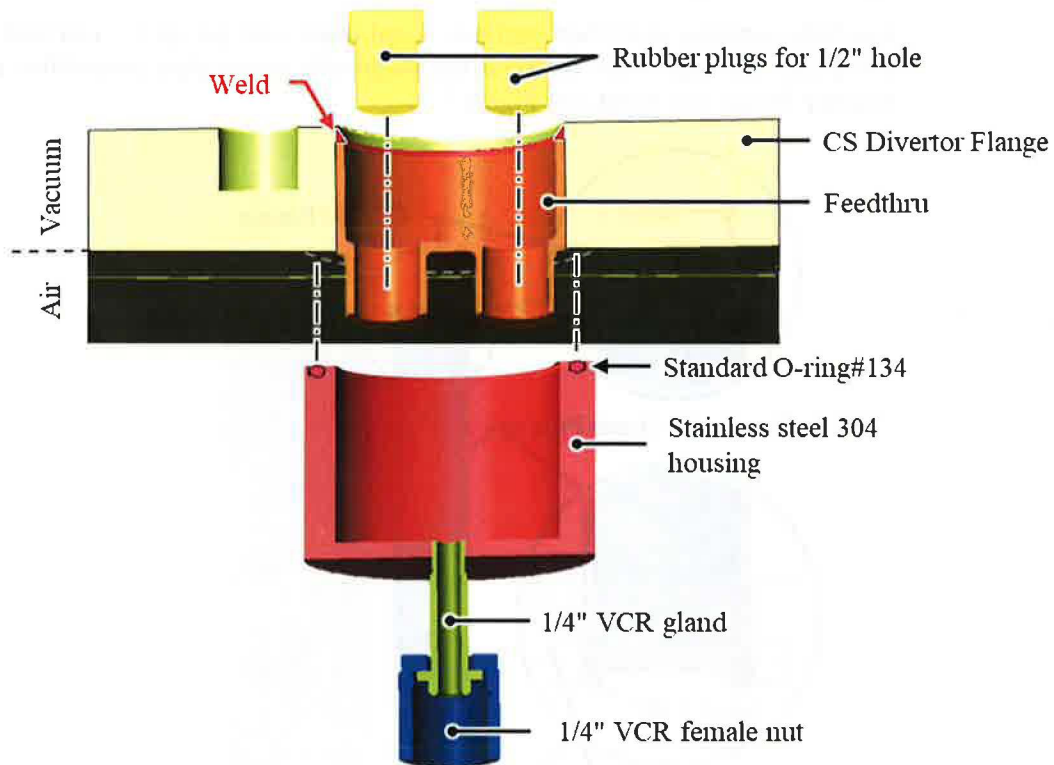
Proposed leak testing setup and equipment for qualifying the weld between the feedthrough and divertor flange
